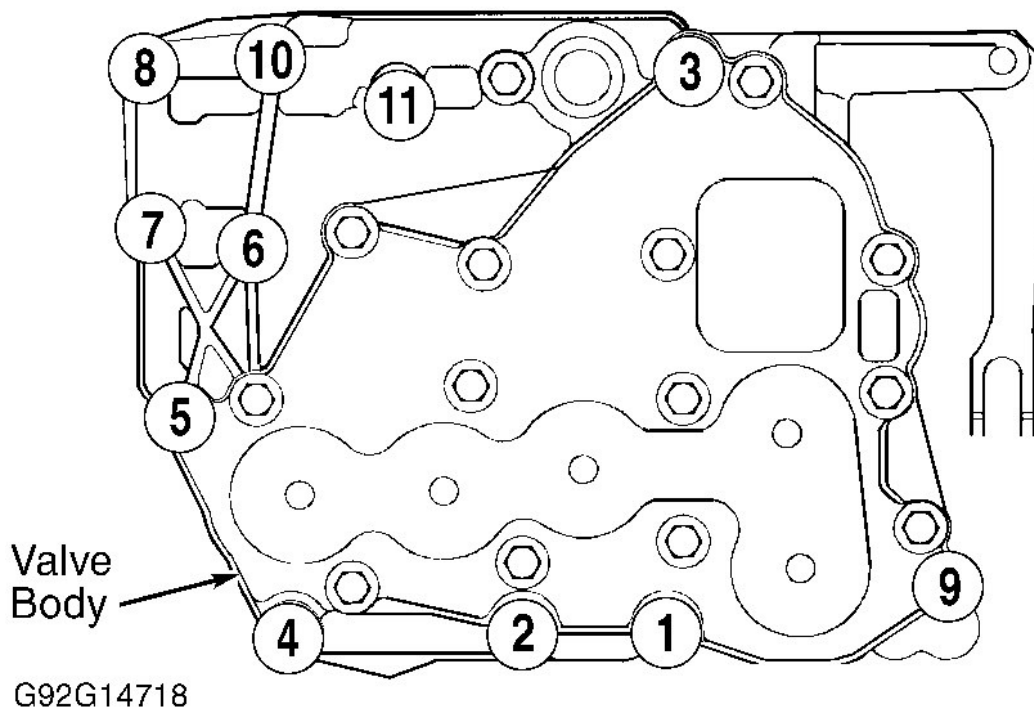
Valve Body-To-Case Bolt Tightening Sequence
